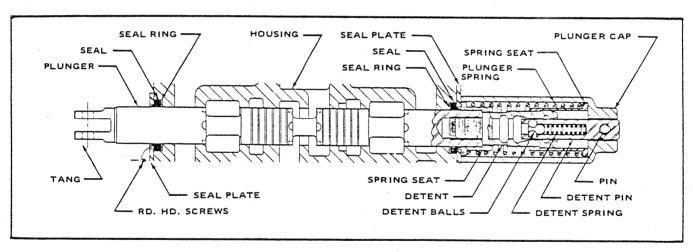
Double Acting - Spring Centered - Detent Positioned Plunger (Hydraulically Balanced)
